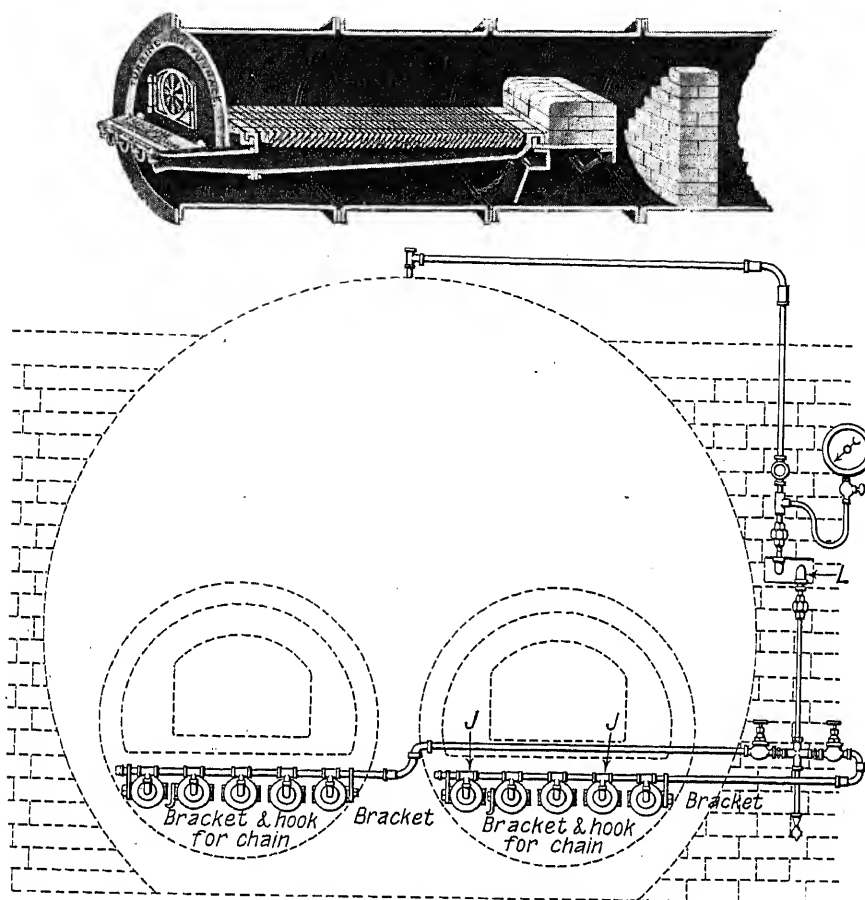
FIRE-GRATE AND VIEW OF TURBINE BOILER.
